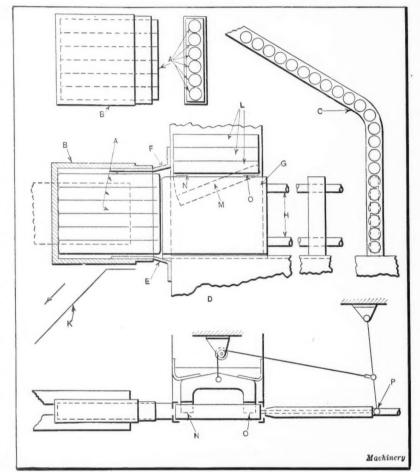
Feeding Device for Cylindrical Rolls packed in Boxes holding Six Rolls
